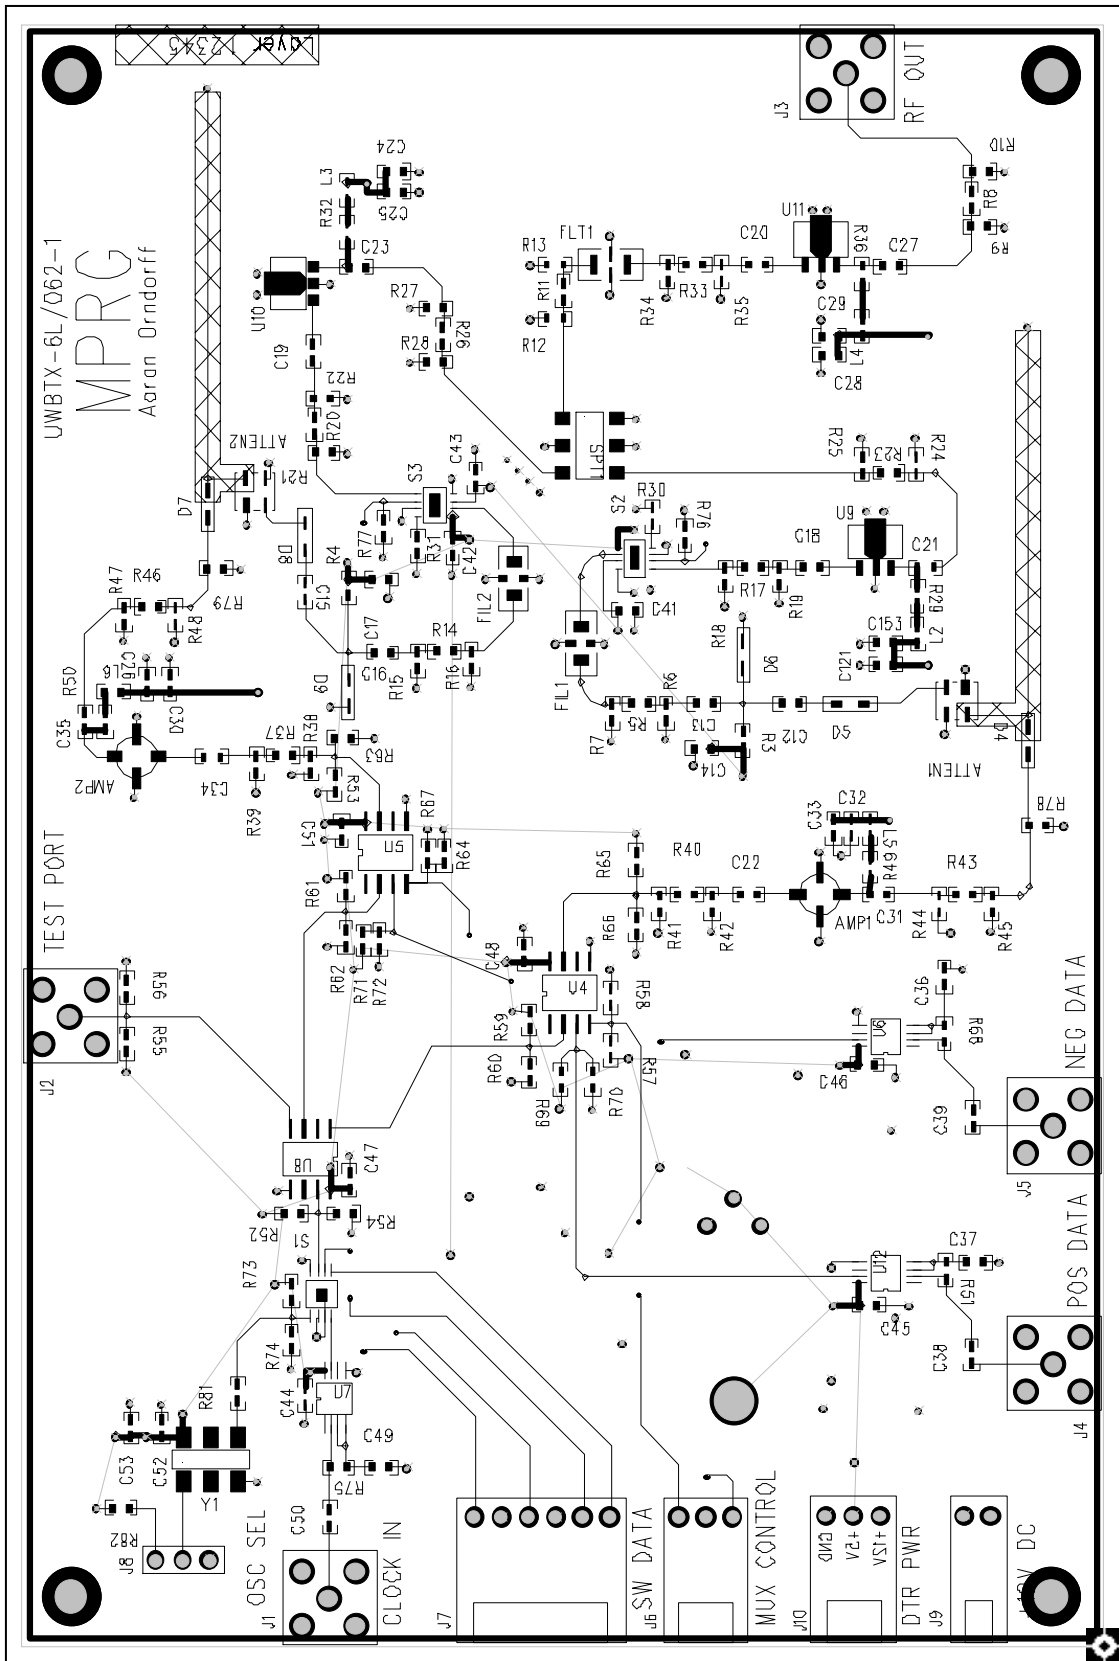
UWB Transmitter PCB Layout for Top Layer
